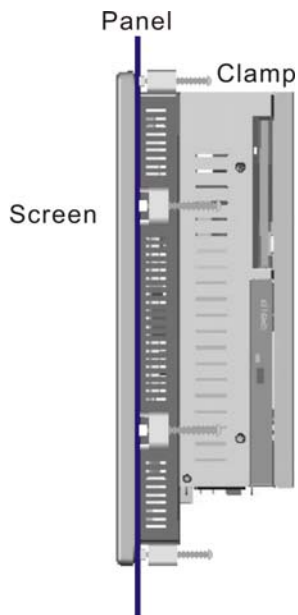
Tighten the Panel Mounting Clamp Screws
